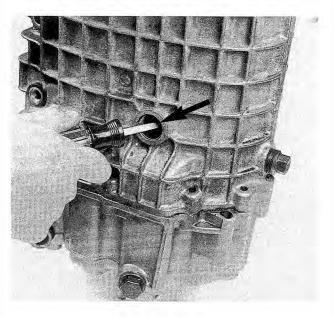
Screwdriver being used to guide layshaft into bearing shell (arrow) as front case is installed.
